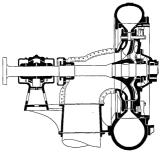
Horizontal shaft turbine showing draft elbow,
